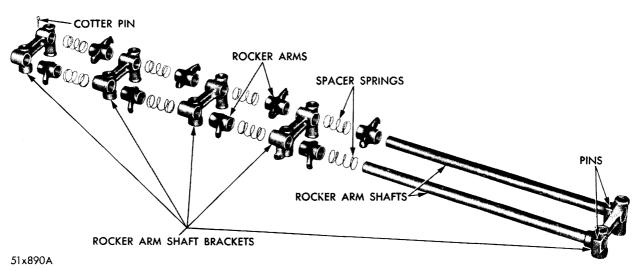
Rocker Shaft Assembly (Disassembled View) (FirePower)
